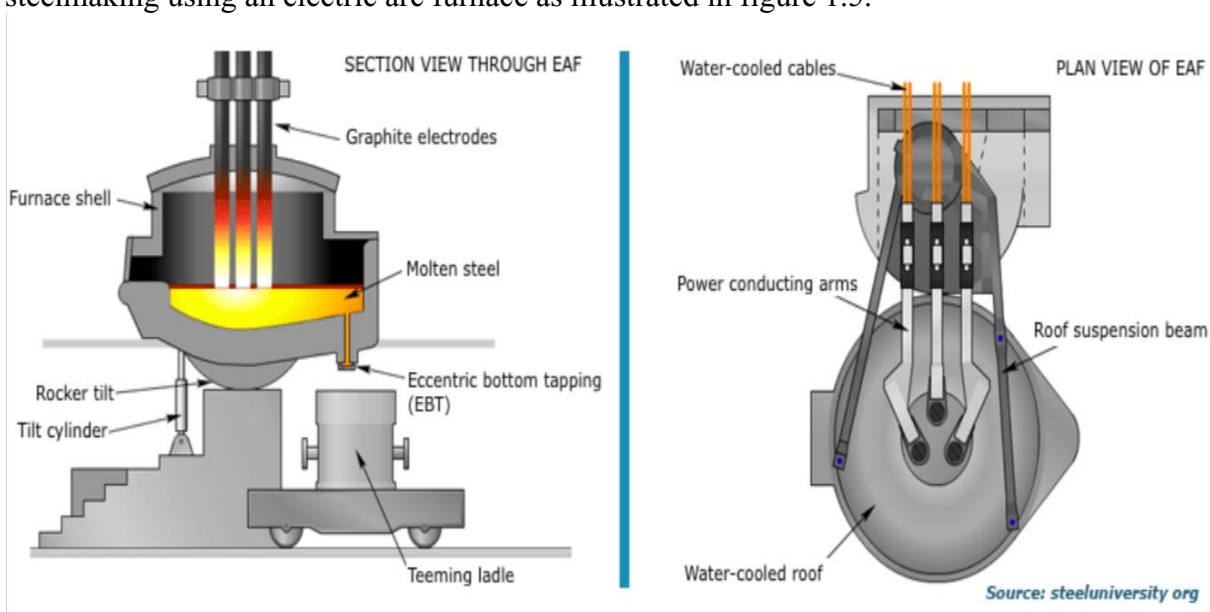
Section (a) and plan (b) view of an electric arc furnace
